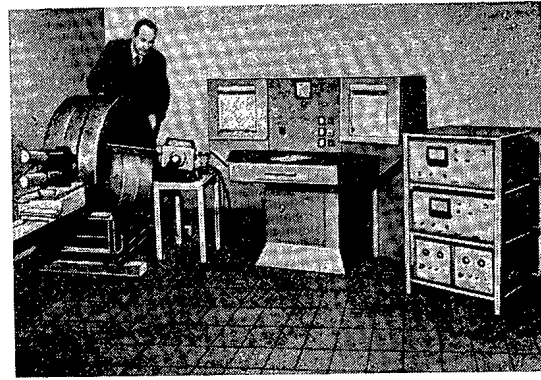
Automatic installation for γ -ray inspection of welded circumferential seams.
